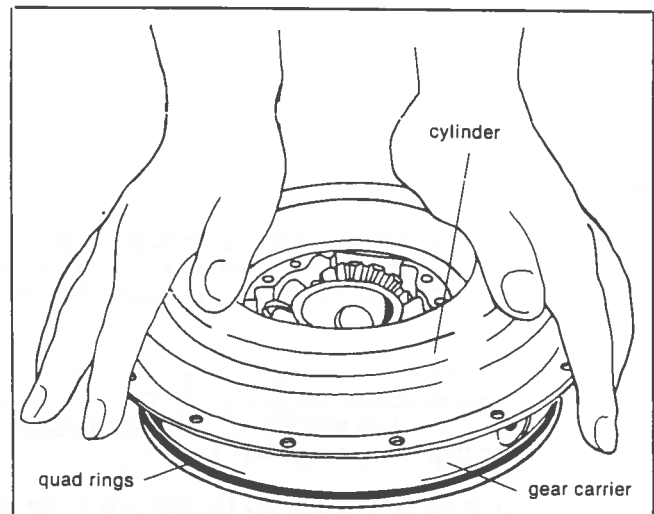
Pressing Cylinder on Bevel Gear Carrier
